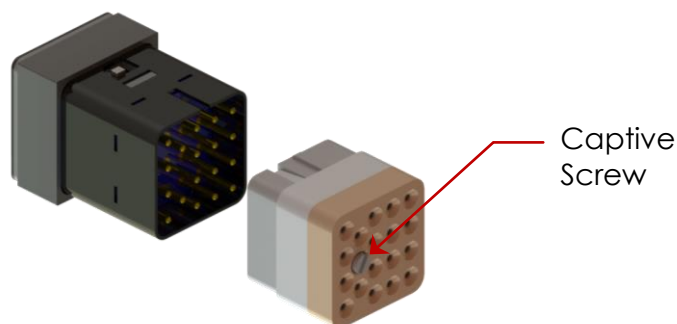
Receptacle Assembly Removal (crimp pin termination version shown)
